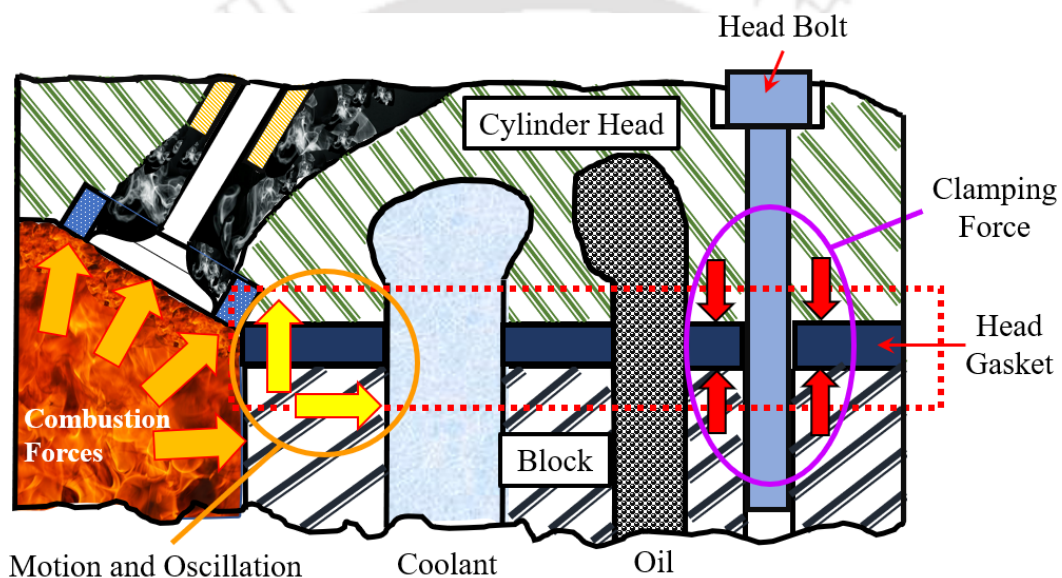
Head gasket fretting mechanism (Reprinted with permission from [33])
